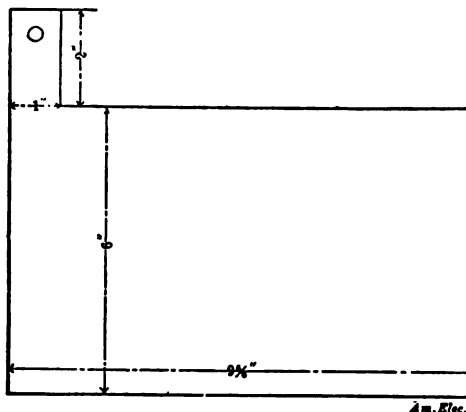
LEAD SHEET FOR OUTER CELL.
